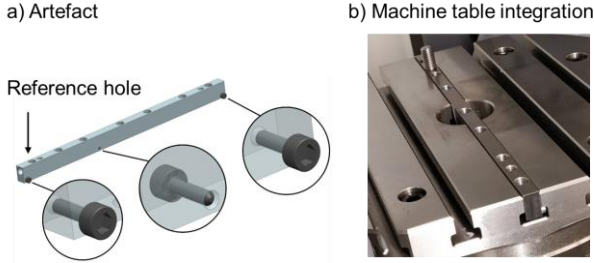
Designed artefact and its integration into a notch of the machine tool table
